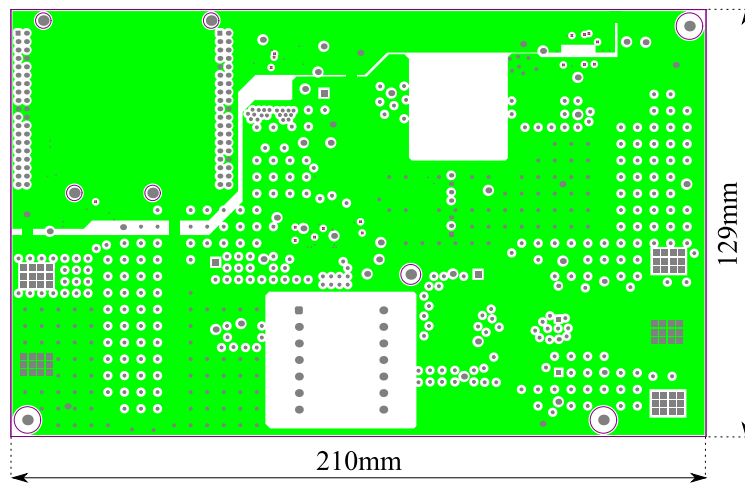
Layout of the inner ground layer of the PCB prototype.
